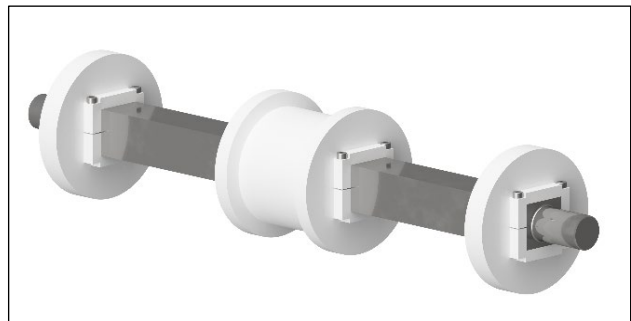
IDLE SHAFT CENTRAL LUG IDLE AND SUPPORT PULLEYS
